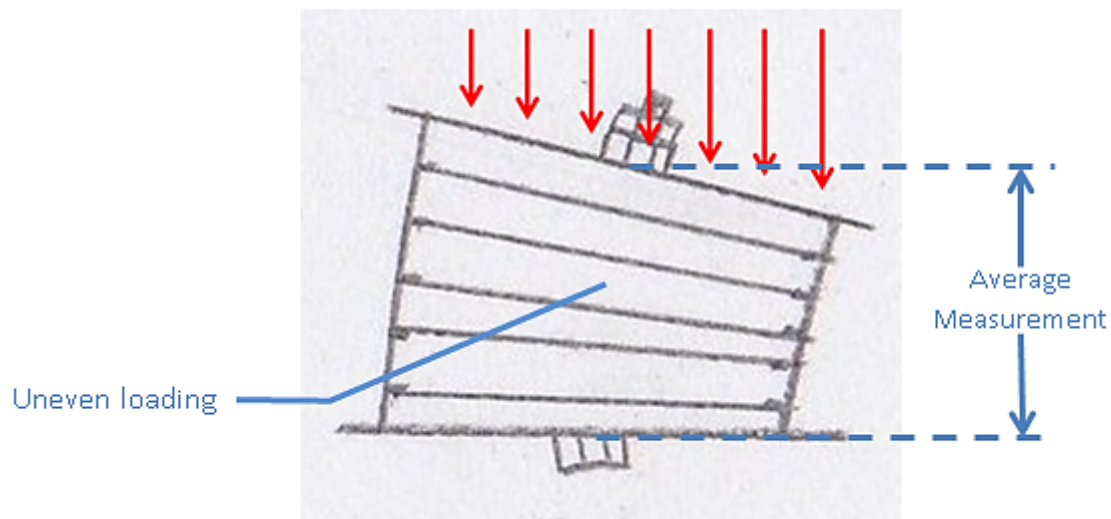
Side view of the spring pack showing uneven loading caused by the axial thermal expansion of the engine.
